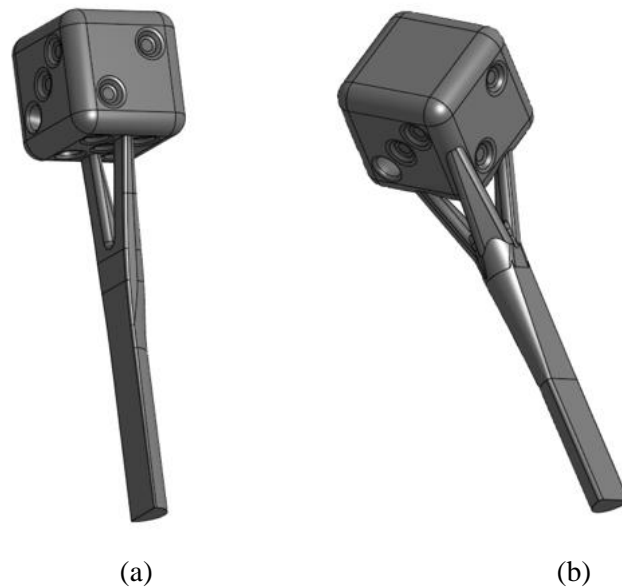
The original sprue design (a) allowed for the parts to fill but left bubbles due to the parallel bottom surface. The new design (b) allows for the part to fill as well as prevents air getting trapped.
